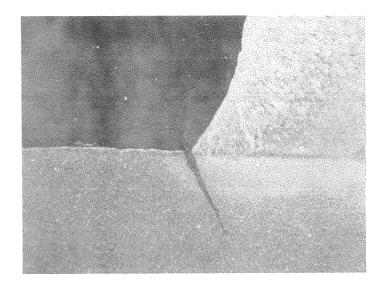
A transverse view of header tube connection showing fatigue crack initiated at toe of fillet weld.
